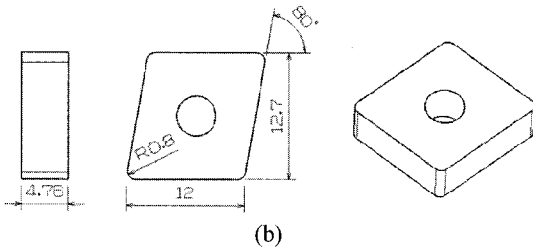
Back rake, relief angle and geometry of a cutting tool
